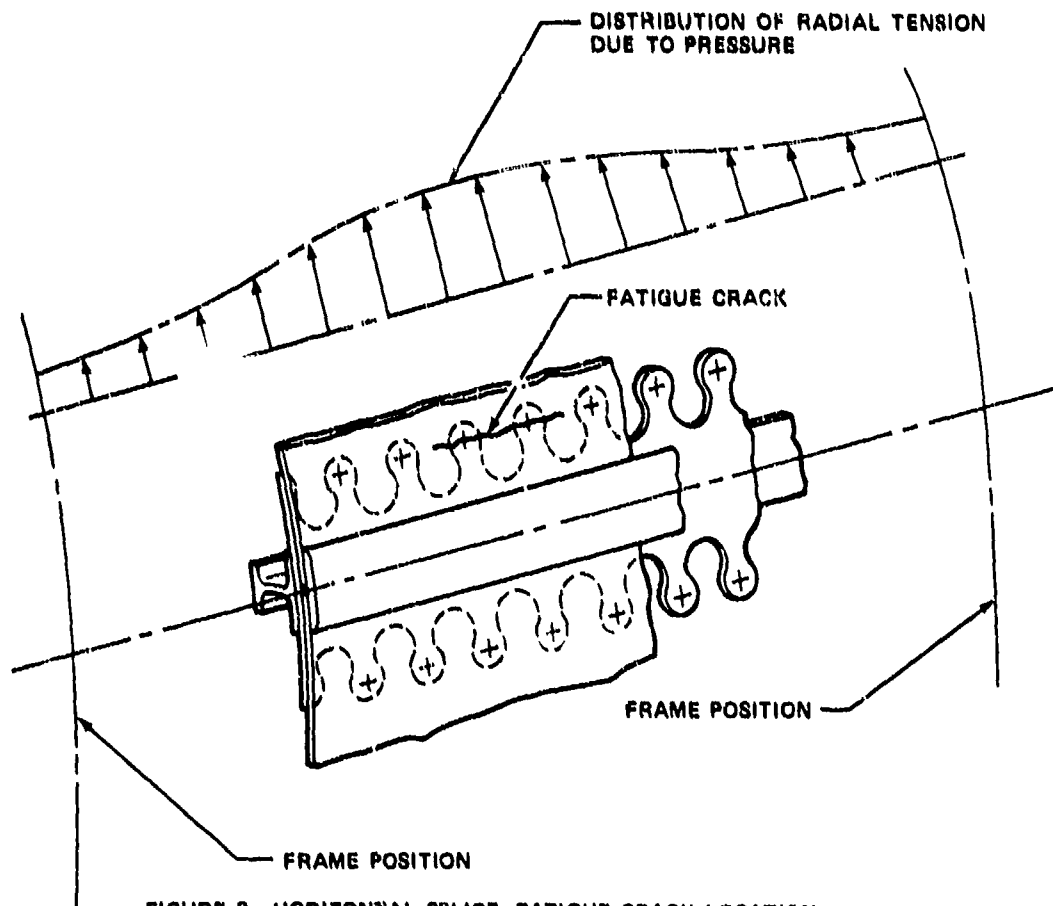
HORIZONTAL SPLICE, FATIGUE CRACK LOCATION
